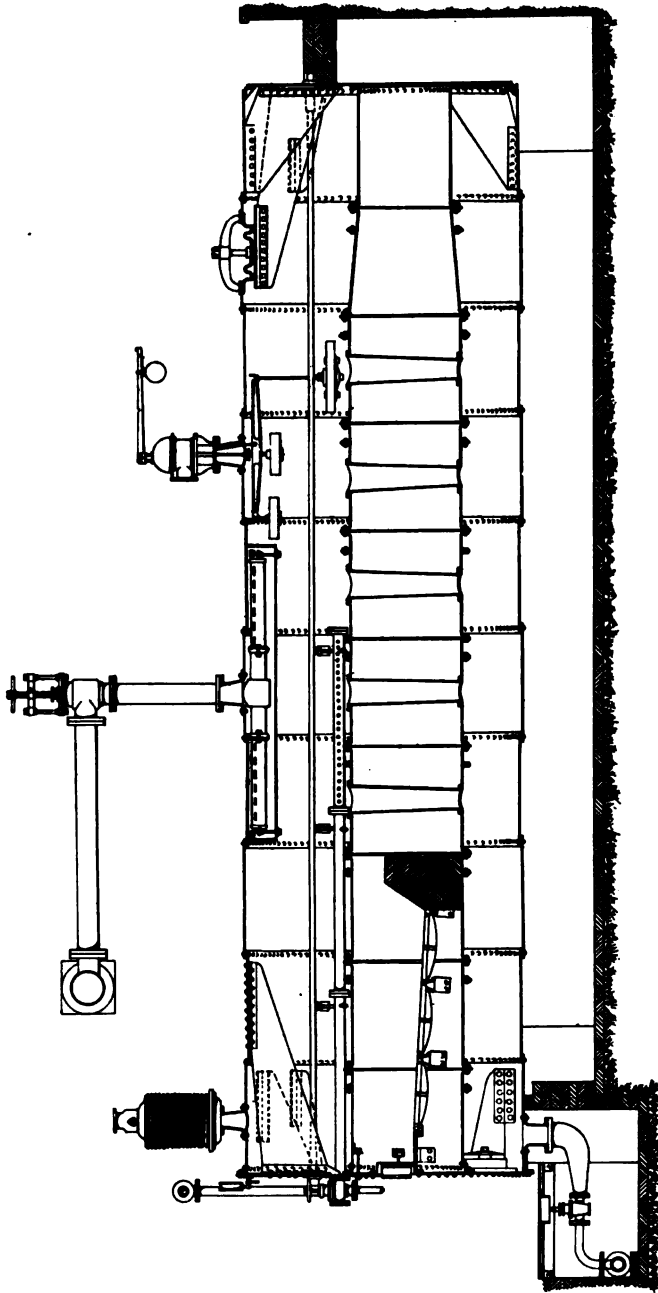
LONGITUDINAL SECTION OF LANCASHIRE BOILER WITH GALLOWAY TUBES.
